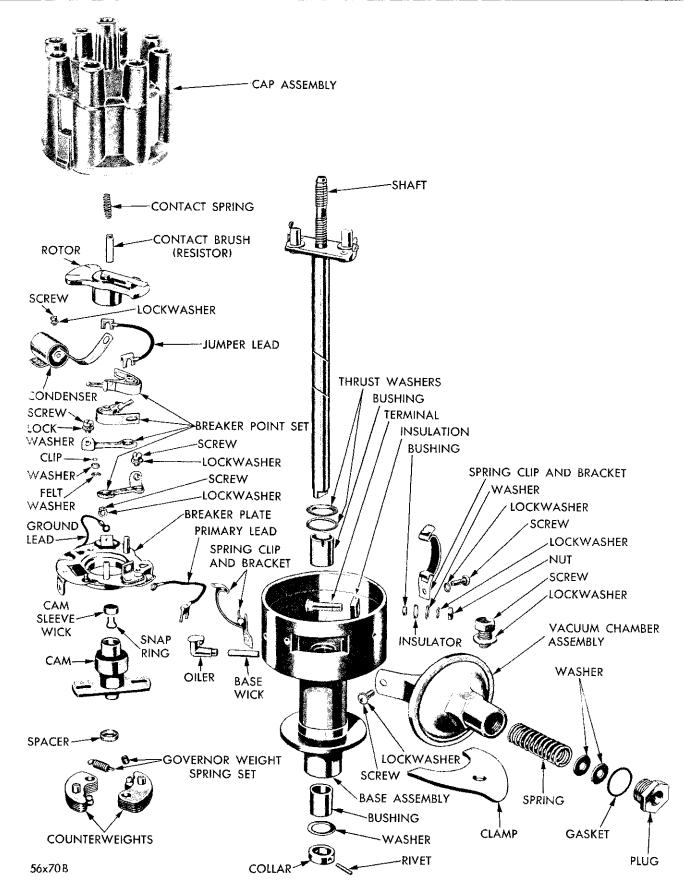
Ignition Distributor (Exploded View) Double Breaker
